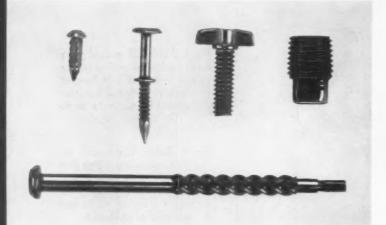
Thread-rolling is often combined with other cold-heading operations to produce parts such as these. Horizontal piece formerly was machined and made in two pieces.
